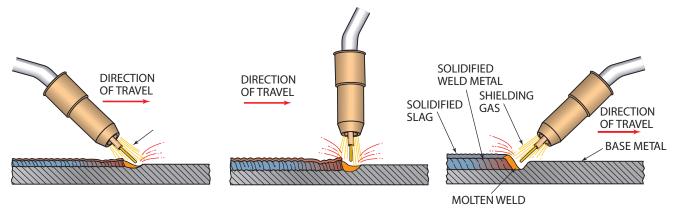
Changing the welding gun angle between forehand, perpendicular, or backhand angles will change the shape of the weld bead produced.
